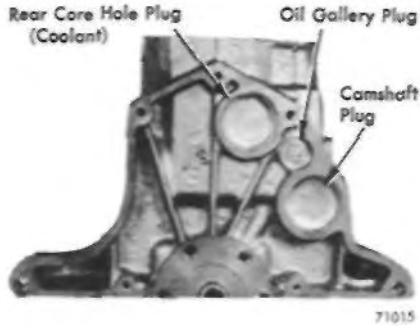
Rear Camshaft and Oil Gallery Plugs
